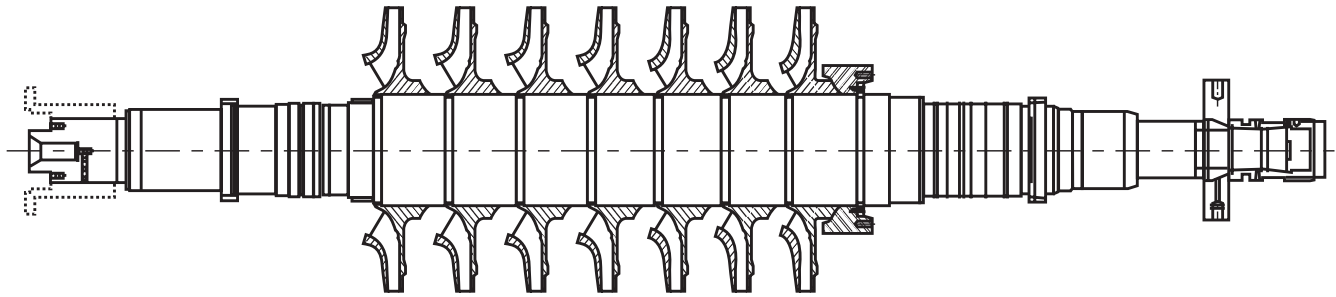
Typical Multi-stage High-pressure Centrifugal Compressor Rotor
